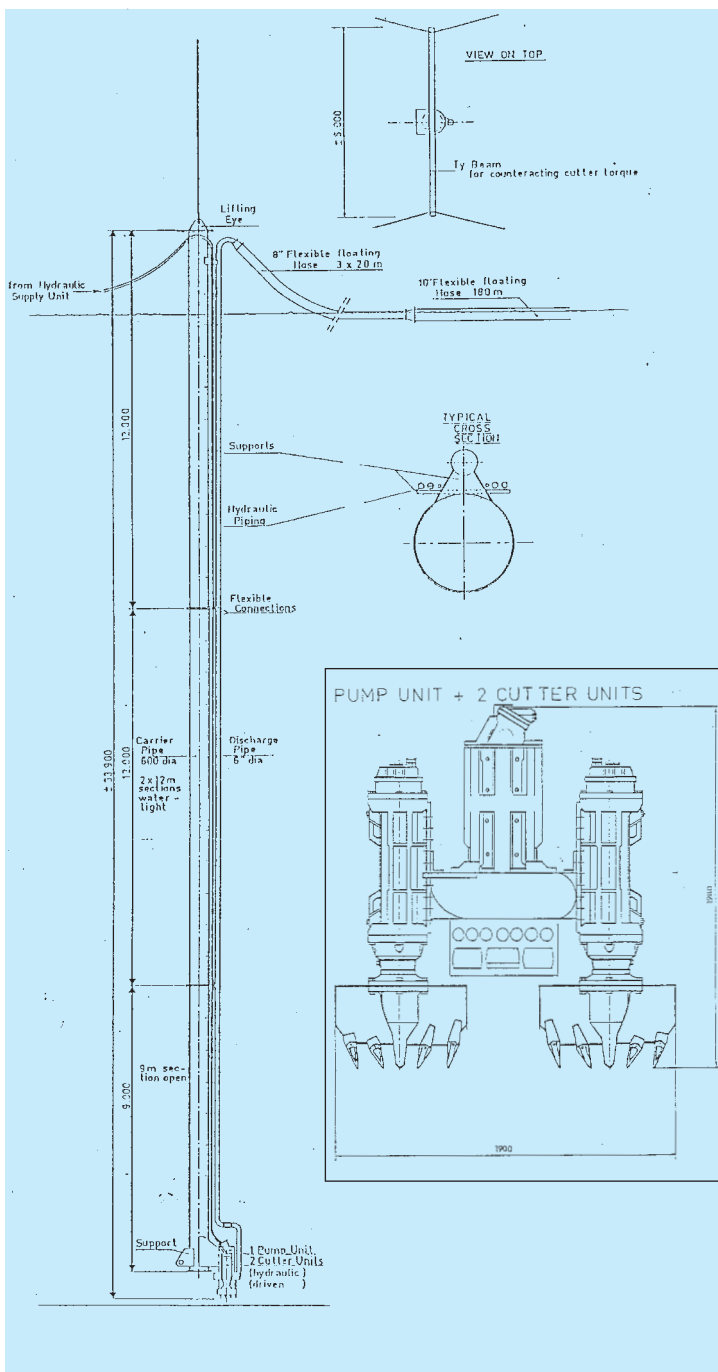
General arrangement of the steel pump; insert: one pump unit and two cutter units, hydraulic driven.
